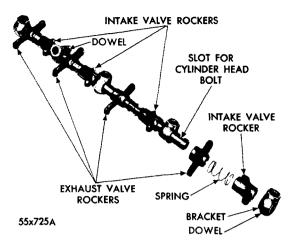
Single Rocker Shaft Assembly (Disassembled View)
